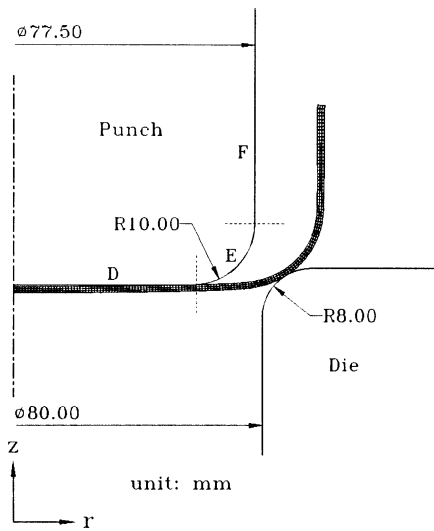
Tools' dimensions for the cylindrical cup redrawing process.
